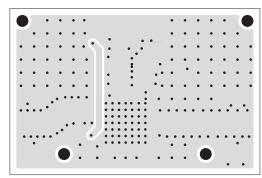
SKY65387-11 Evaluation Board Assembly Drawing
